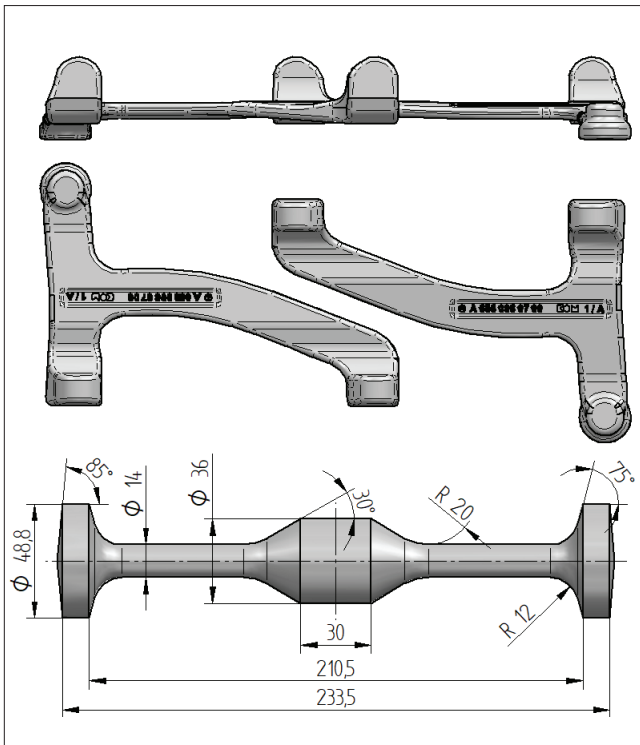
Applied arrangement of forgings in the double forging process (top) and the preform accepted for forging (bottom)
